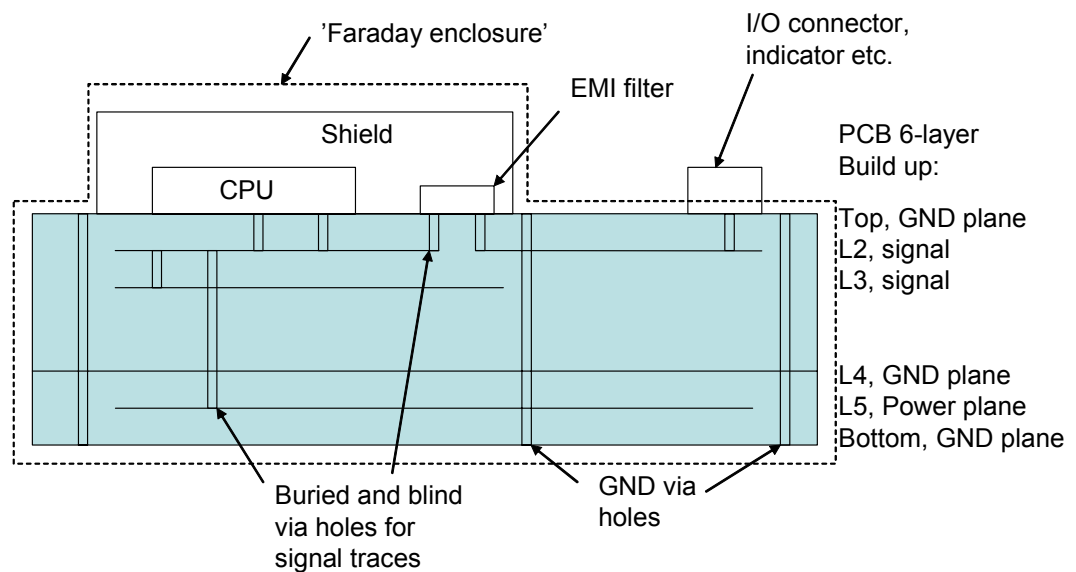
Avoiding EMI with Faraday enclosure, e.g. 6-layer PCB
